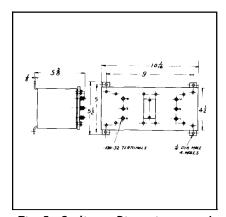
Outline Dimensions and Drilling Plan for Phase Shifting Transformer used with 3-phase, 4-wire Varmeter.
